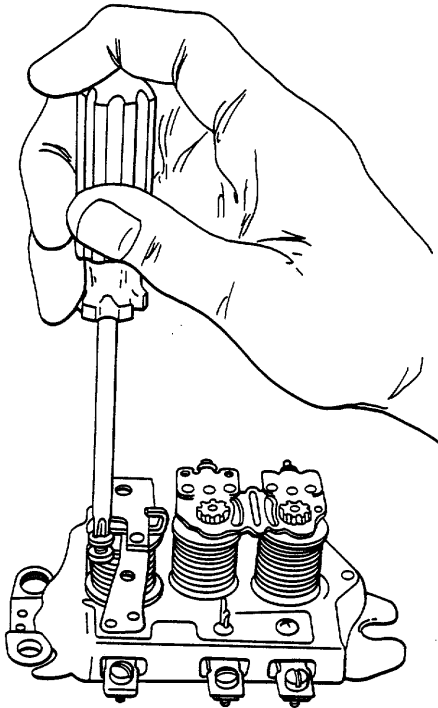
Test equipment for adjusting cutout relay closing voltage.
